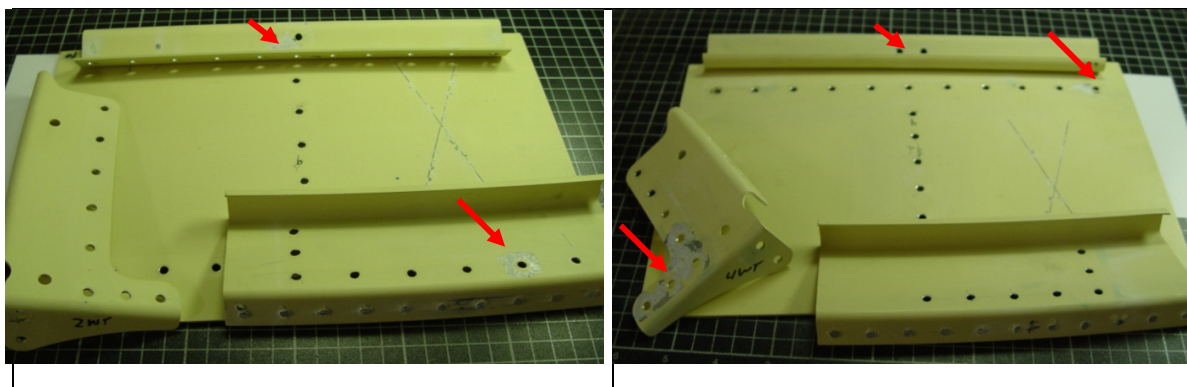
Corrosion Test on demonstrator in Salt Spray test after disassembling	Figure-5: Corrosion Test on demonstrator in Salt Spray test after disassembling
